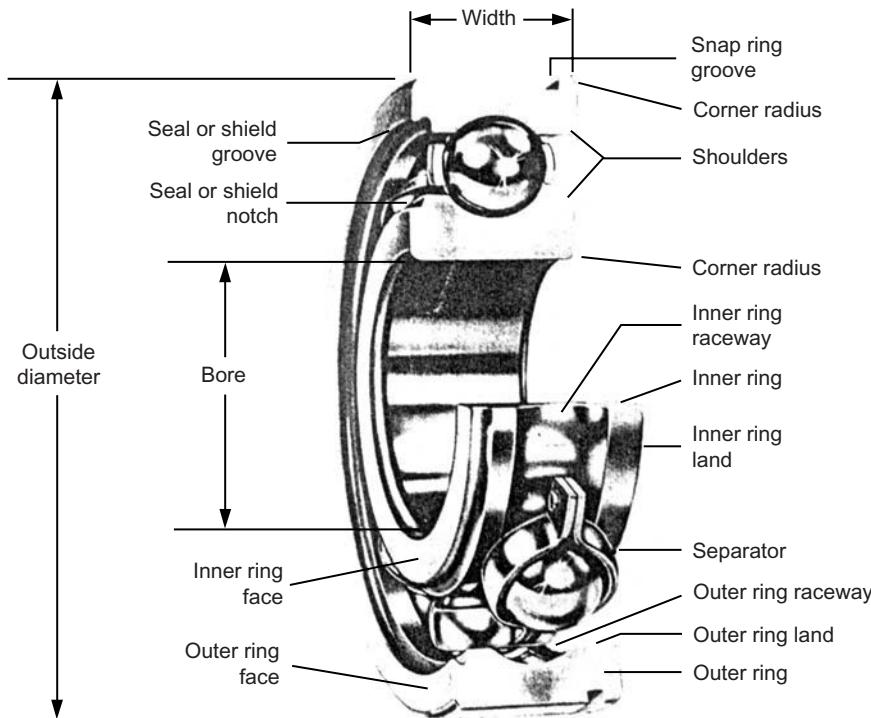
Ball bearing nomenclature. (*Courtesy: New Departure-Hyatt Bearing Division, General Motors Corporation.*)
